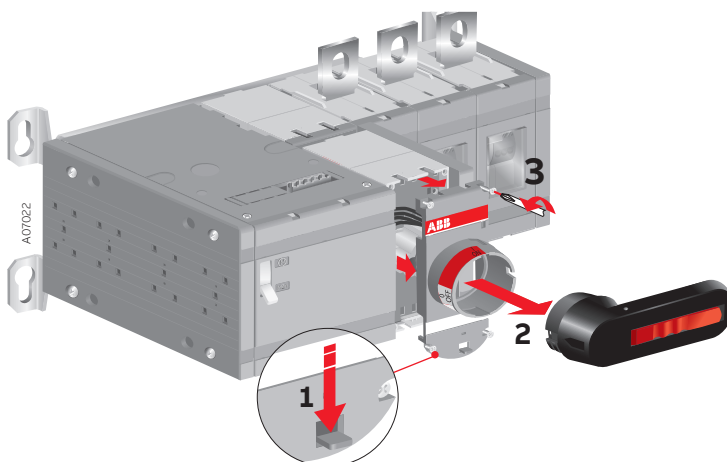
Optional extra; Test auxiliary contacts can be mounted on the switch mechanism, first remove the mechanism cover as shown in the figure
